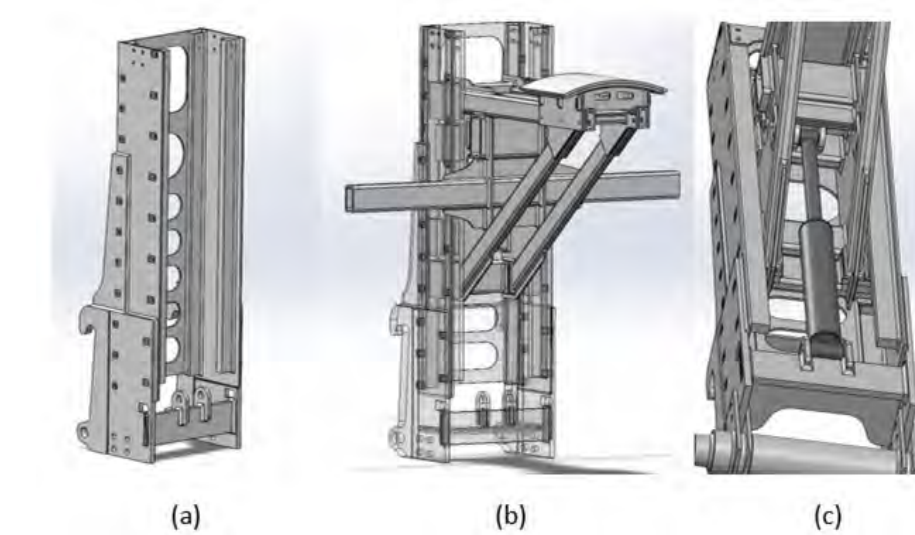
Standalone CAD models of Main assembly, sliding assembly and piston assembly
